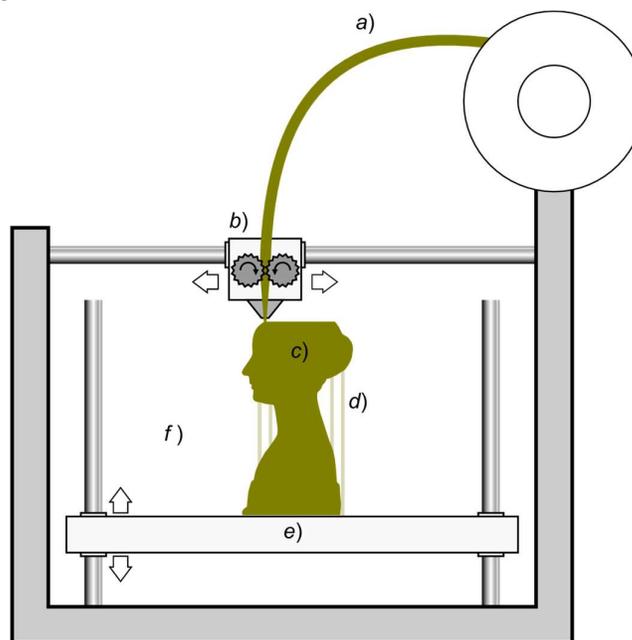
Schematic representation of the 3D printing technique known as Fused Filament Fabrication; a filament a) of plastic material is feeded through a heated moving head b) that melts and extrudes it depositing it, layer after layer, in the desired shape c). A moving platform e) lowers after each layer is deposited. For this kind of technology additional vertical support structures d) are needed to sustain overhanging parts.[44]
